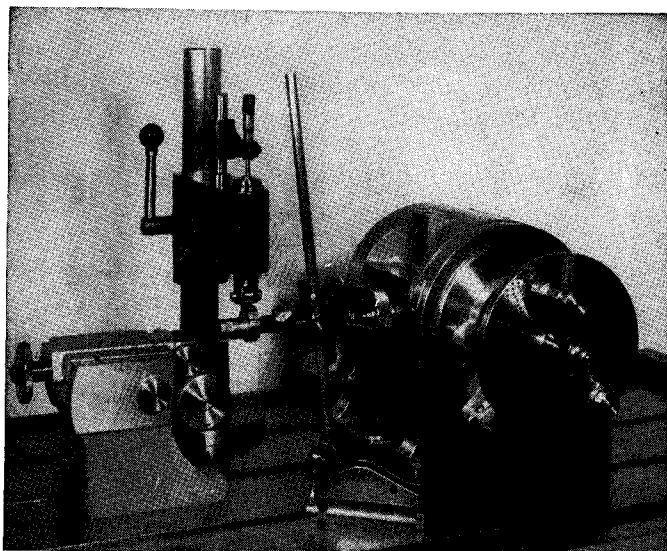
The Index head being used to inspect a camshaft. (The Cincinnati Milling Machine Company)
